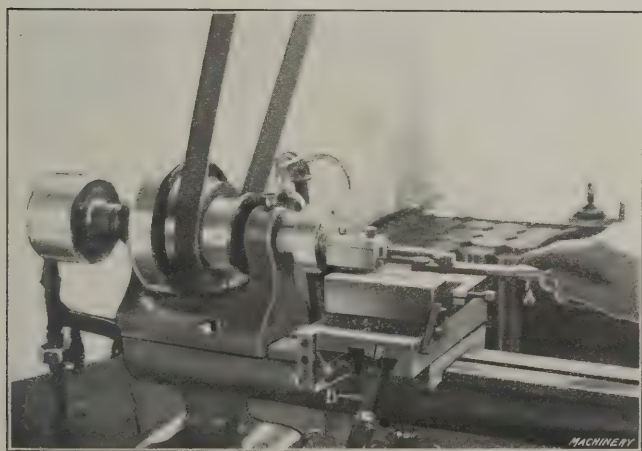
Lathe equipped with Air-chuck for facing Plates
